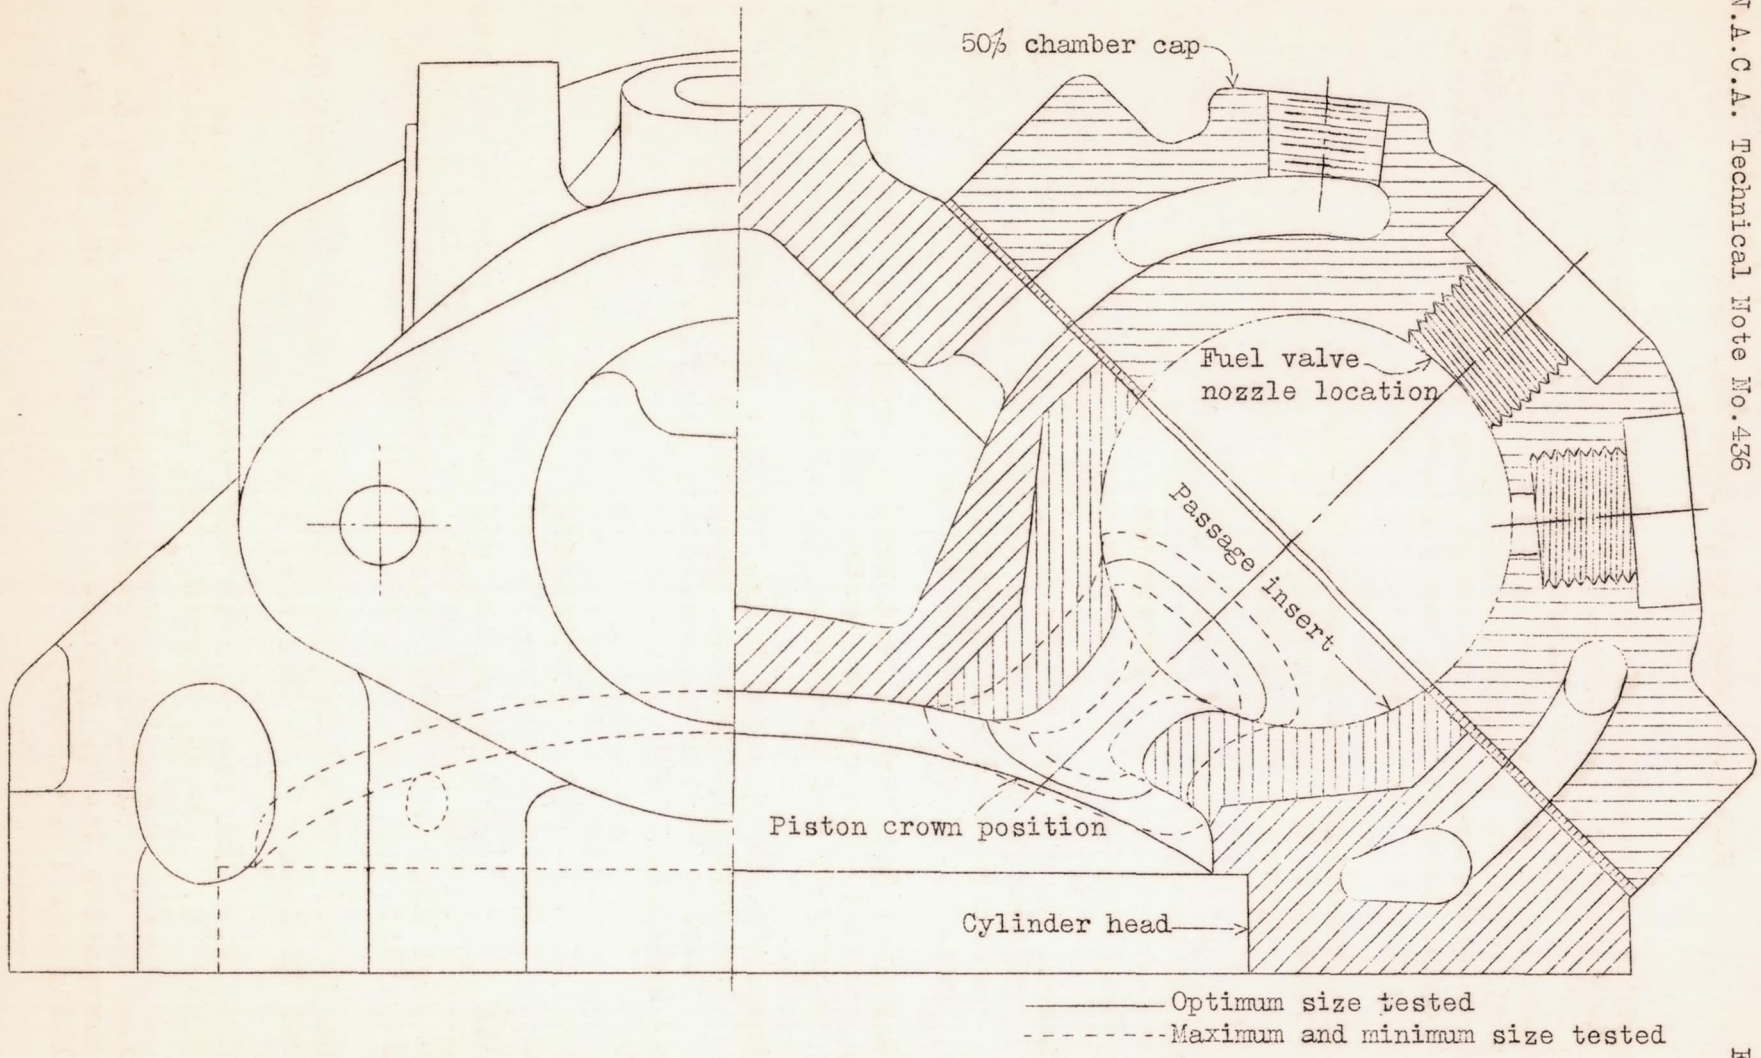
N.A.C.A. cylinder head design No.7 , showing removable insert and three passage outlines.
